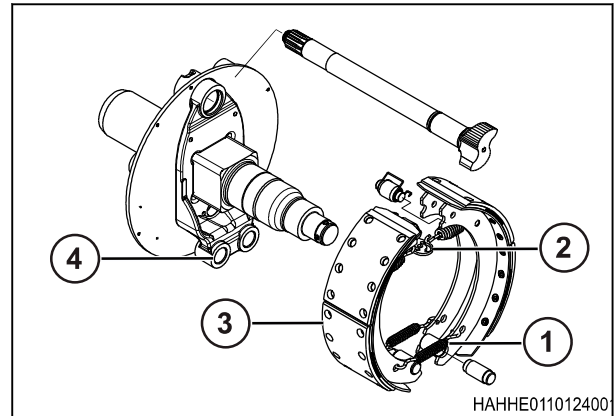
Single axle machines made from serial number AGCxxxxxxJHBxx101 and after
